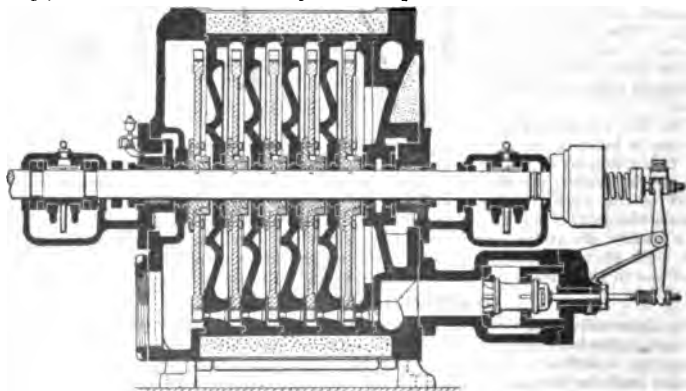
Kerr Multi-pressure-stage Turbine.
